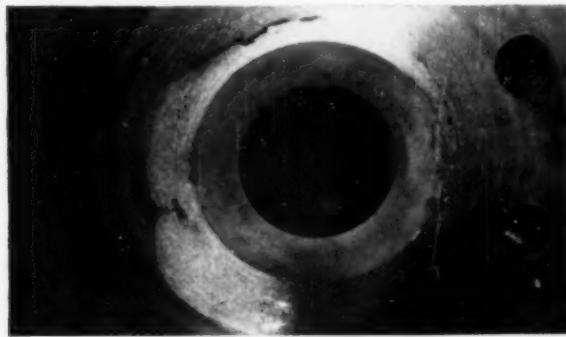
Bottom forging from ammonia synthesis converter after repair of crack.
